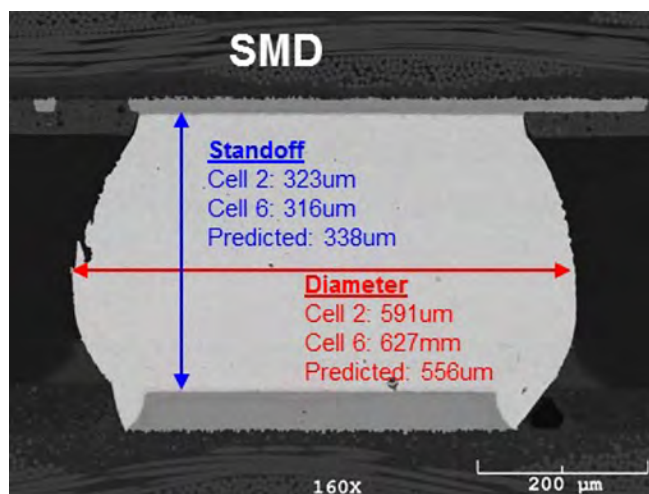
Cross-section of typical SMD solder joint after mounting to PCB.
